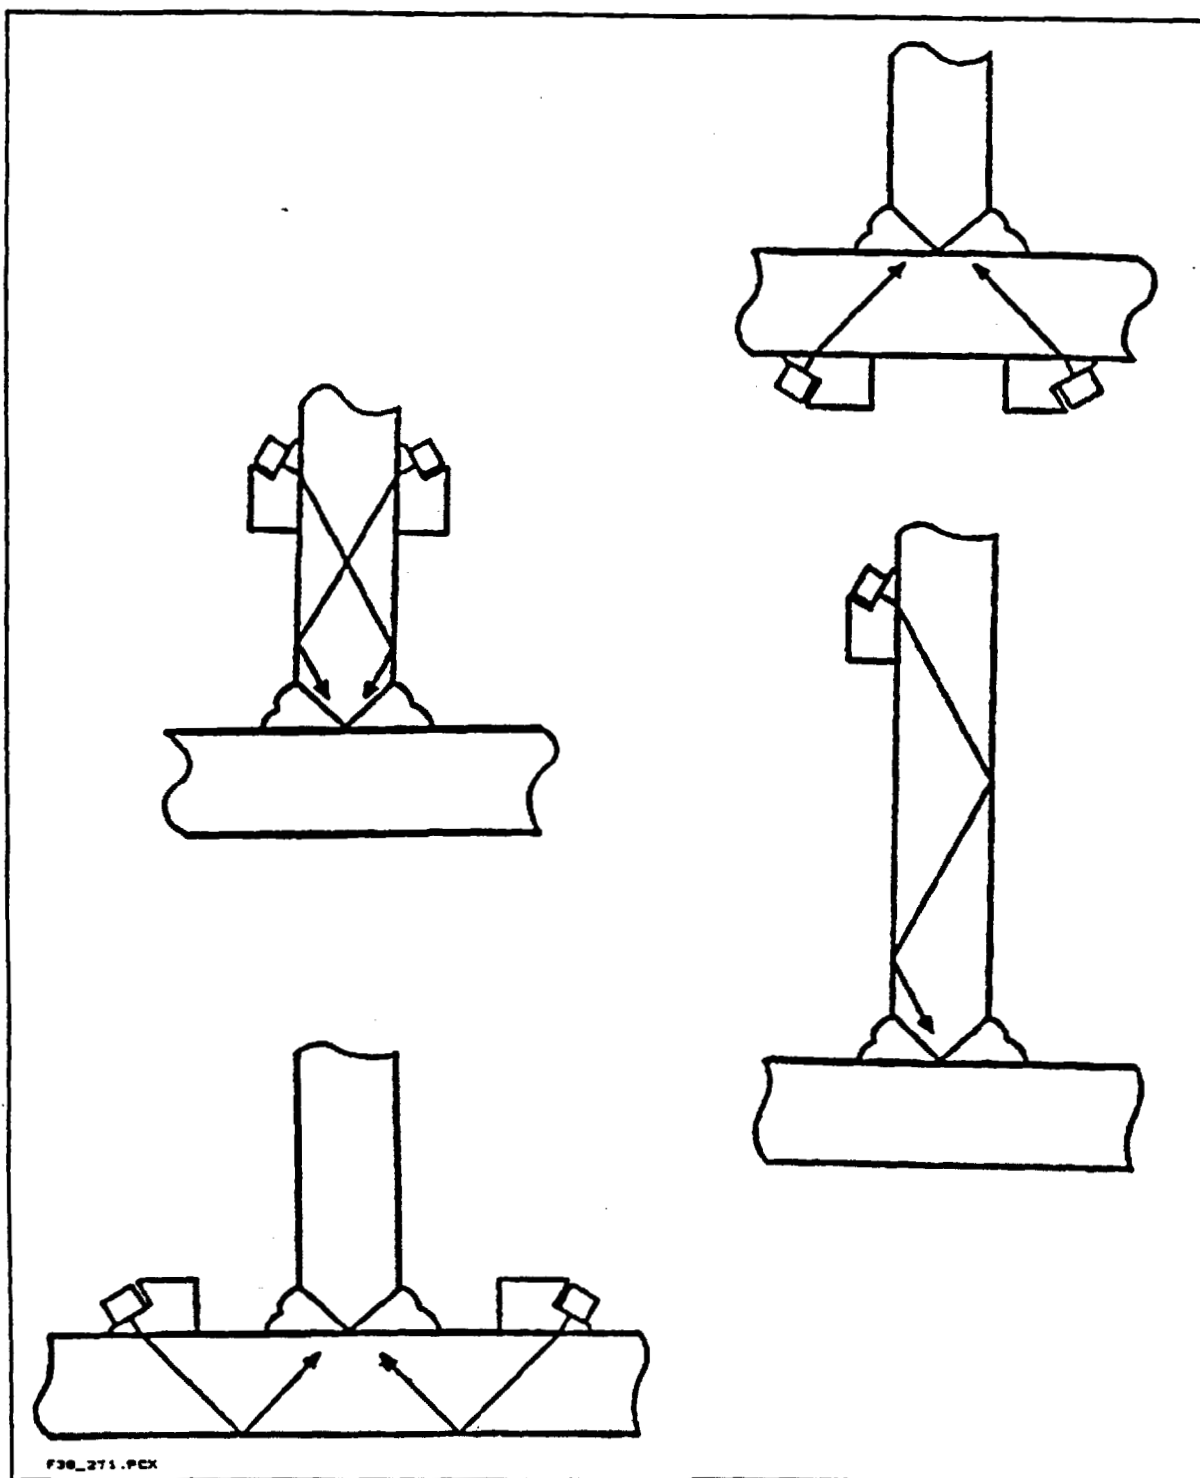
Accepted scanning techniques for tee welds.
